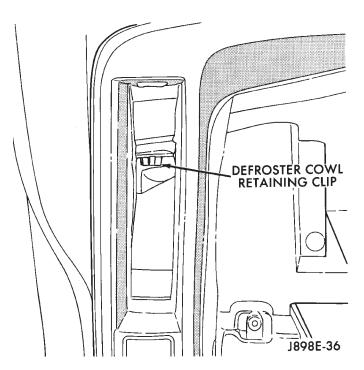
Driver's Side Defroster Cowl Retaining Clip
